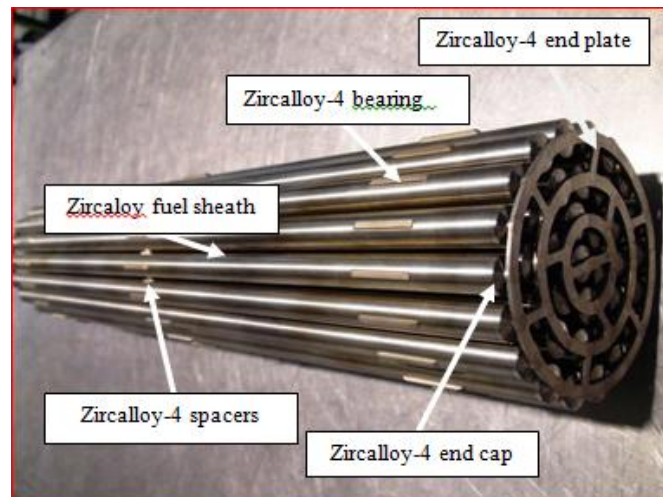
CANDU-6 Fuel bundle assembled from five metallic components
